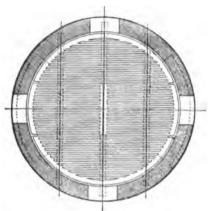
Section of Wood Flatgrate Gas-Producer.
